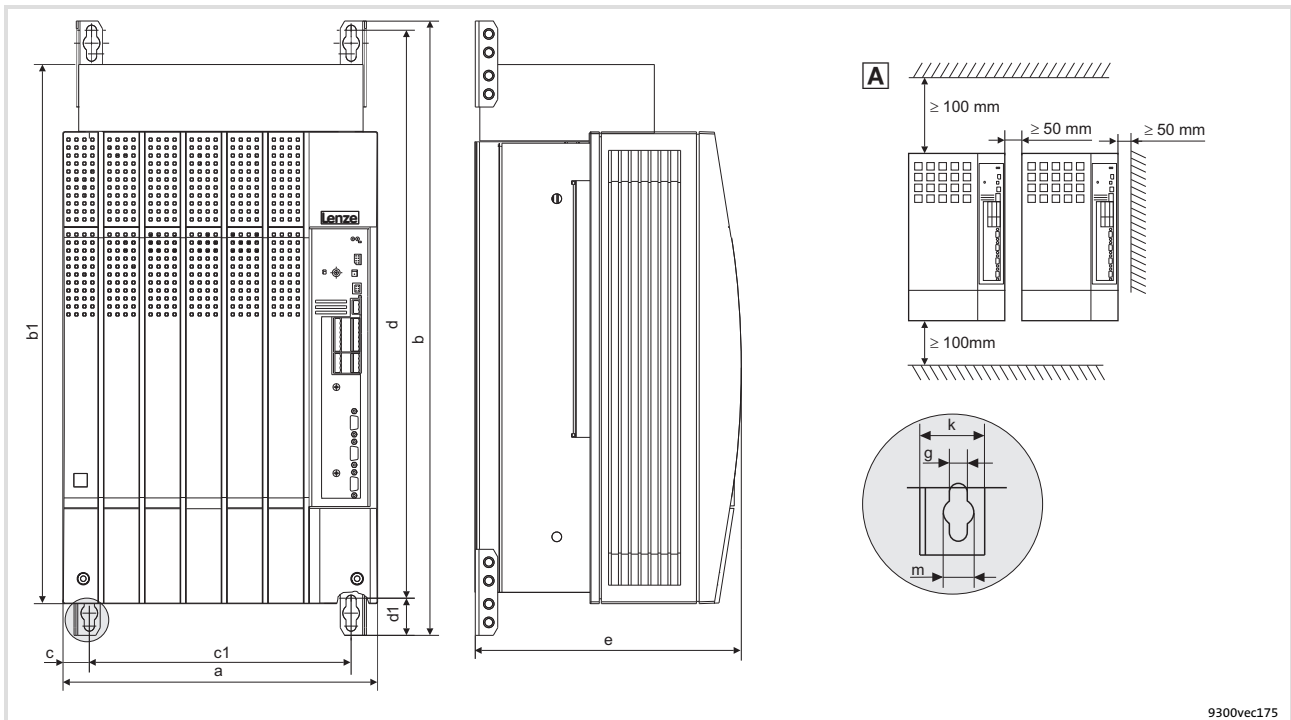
Standard mounting with fixing brackets 55 kW
